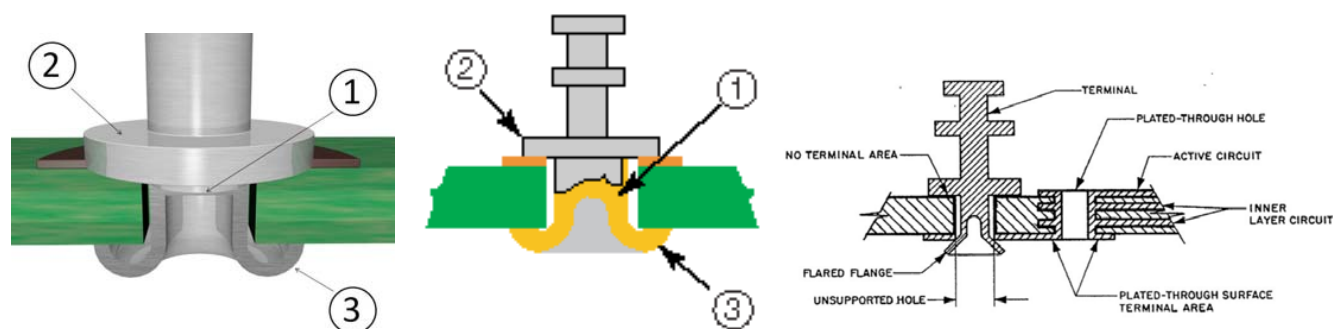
Terminal Mounting - Mechanical PROPOSED REPLACEMENT PIX
